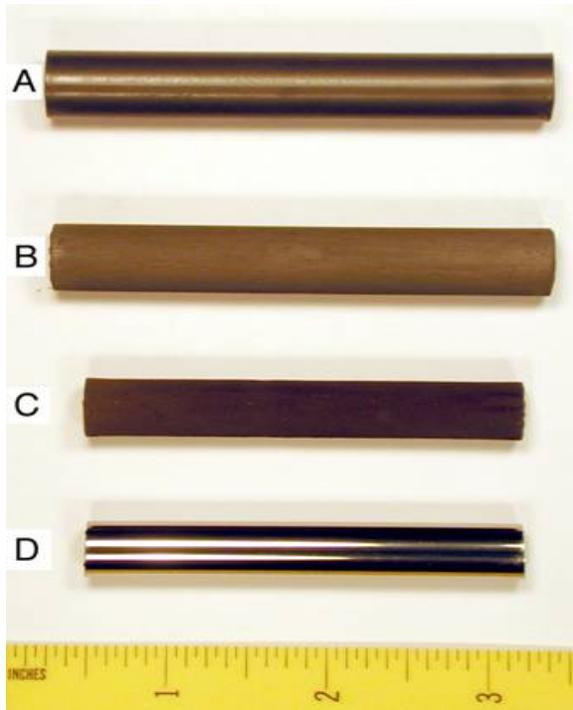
Cermets produced at SIUC (a) as injection molded, (b) following binder removal, (c) following continuous sintering, and (d) following machining.
